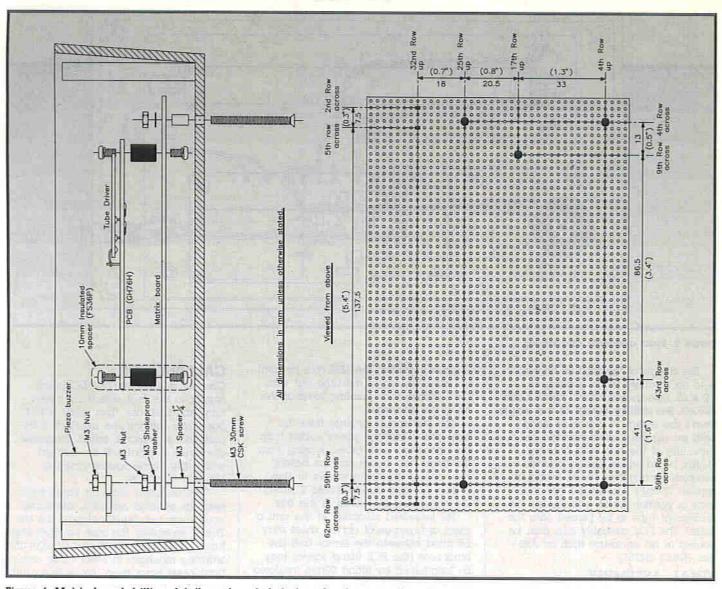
Matrix board drilling details and exploded view showing mounting of the PCB onto the matrix board.
